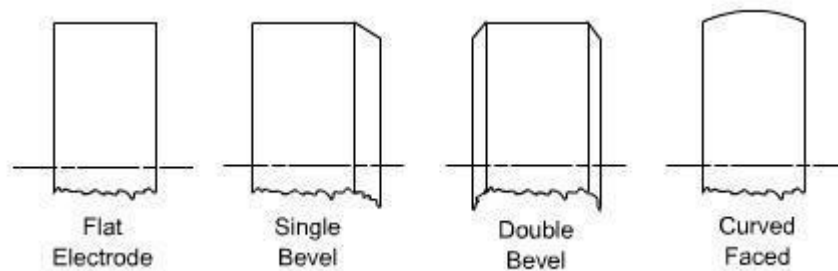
Electrode Shapes of Seam Welding
